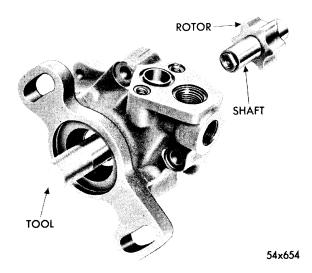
Installing Pump Rotor Shaft with Thimble (Tool C-3350)
